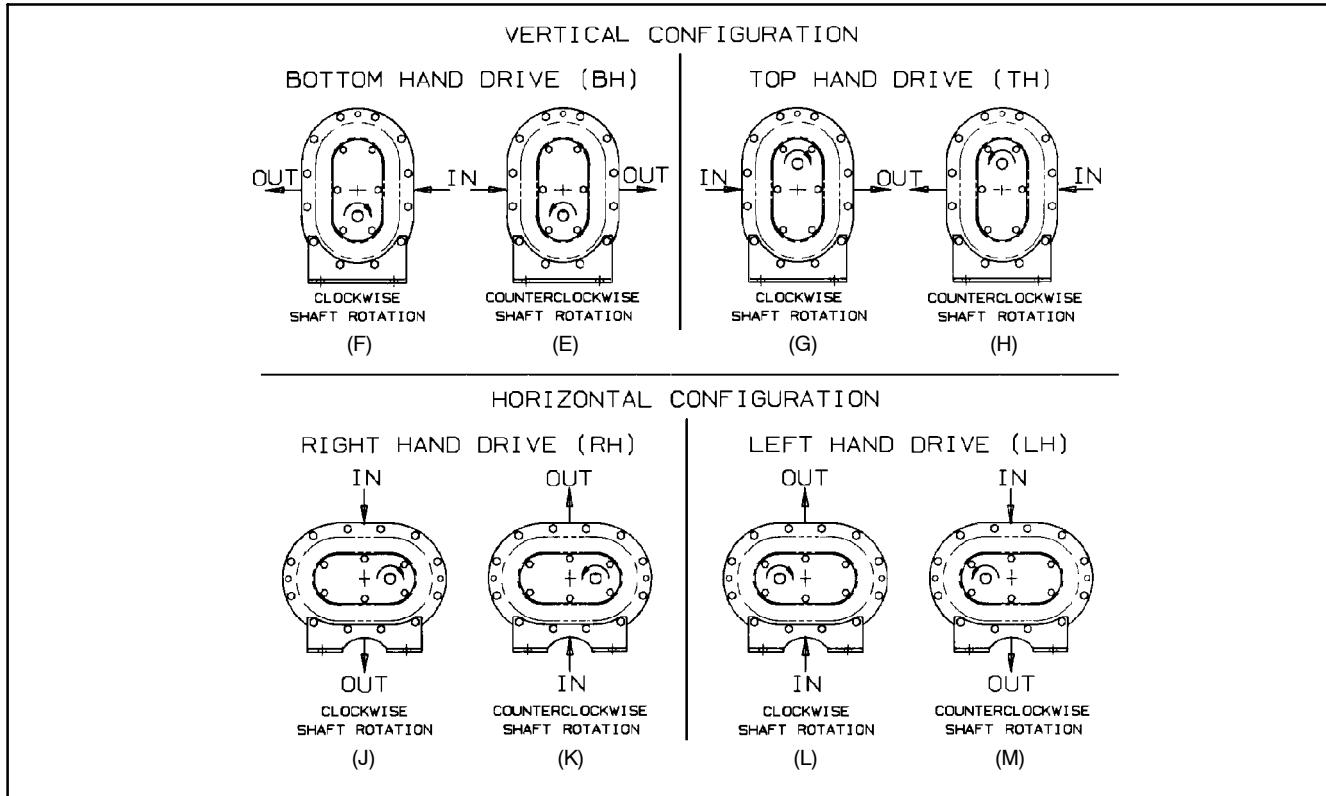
BLOWER MOUNTING CONFIGURATIONS
